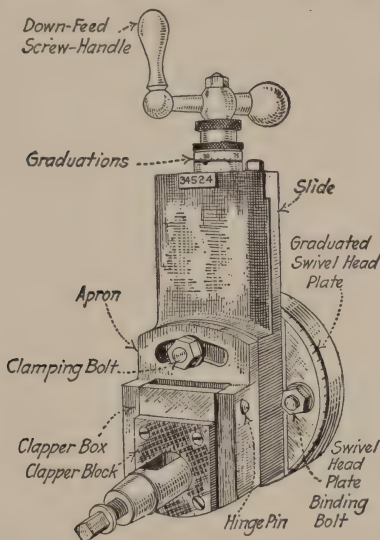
Shaper toolhead. (In the shaper shown in Fig. 75, the swivel headplate binding bolt is number 23.)
